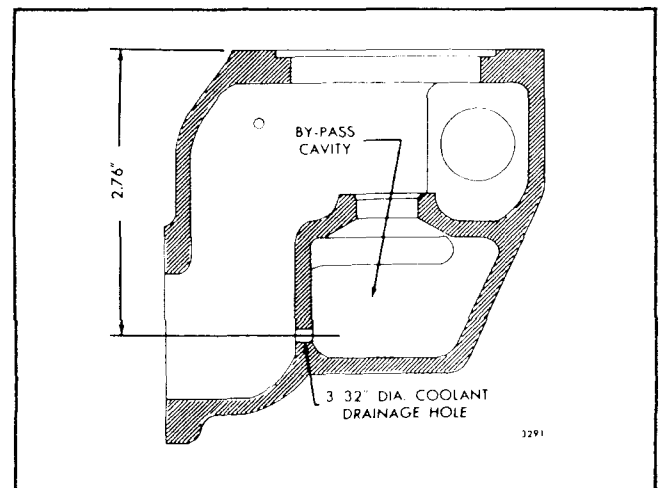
Cross-Section of Thermostat Housing (Early Industrial In-Line Engine)
